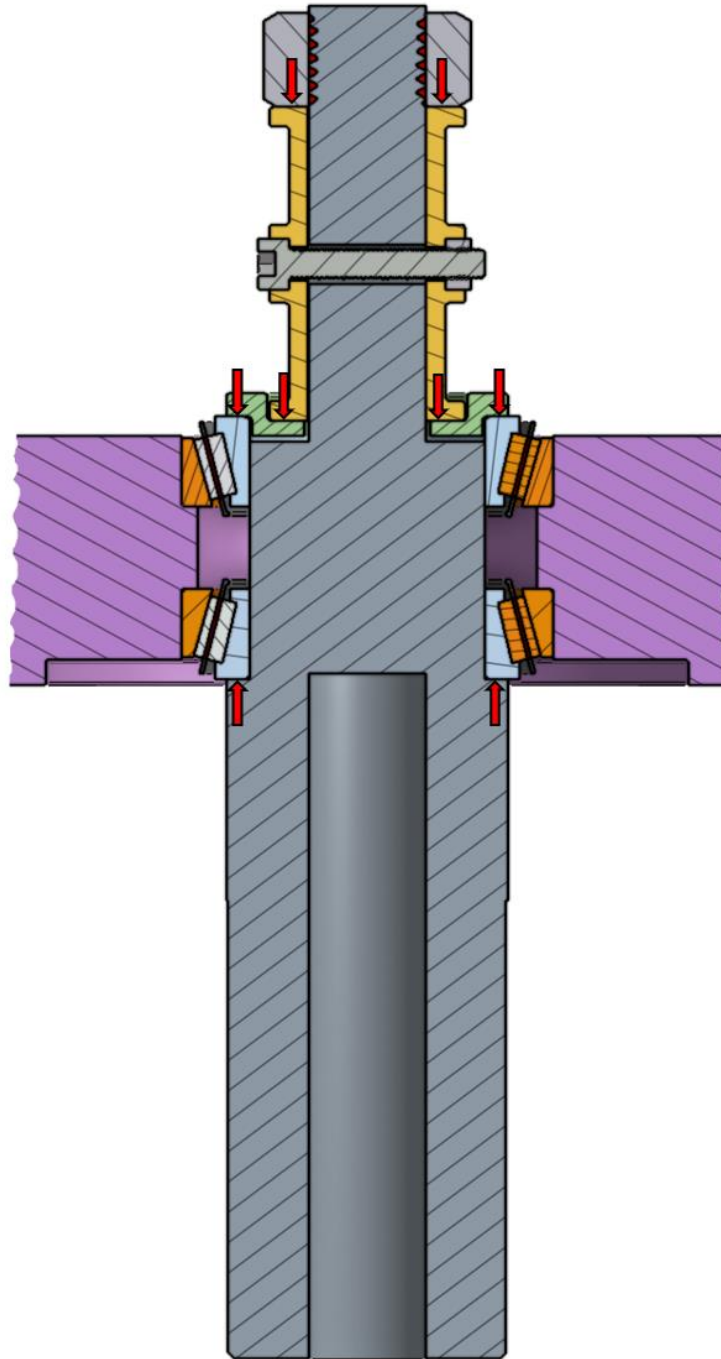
Cross section view of mount plate (purple), shaft (grey), and ankle sheave (yellow) assembly. Bearing preload forces are shown with red arrows. The orange portion of the bearing is press fit into the plate, and the blue portion of the bearing rotates with the shaft. The green spacer was added when we switched from rotary ball bearings to tapered roller bearings.
